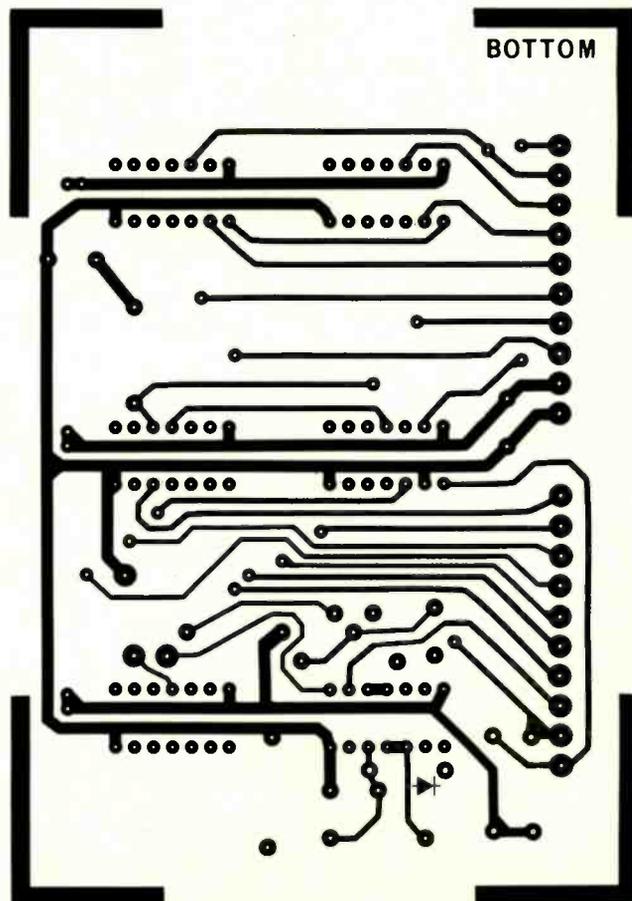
FOIL PATTERN for foil side of double-sided board shown full size.
